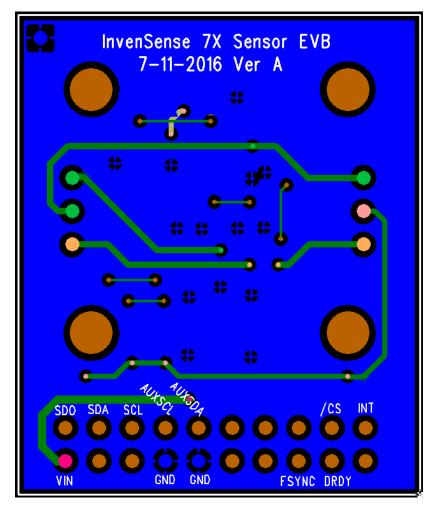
Bottom View of the ICM-20789 EVB Board Layout
